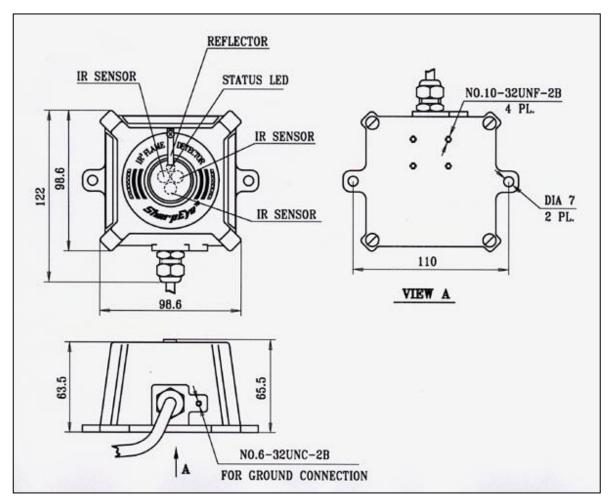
Flame Detector Assembly - Outline Drawing (Cable Output Option)
